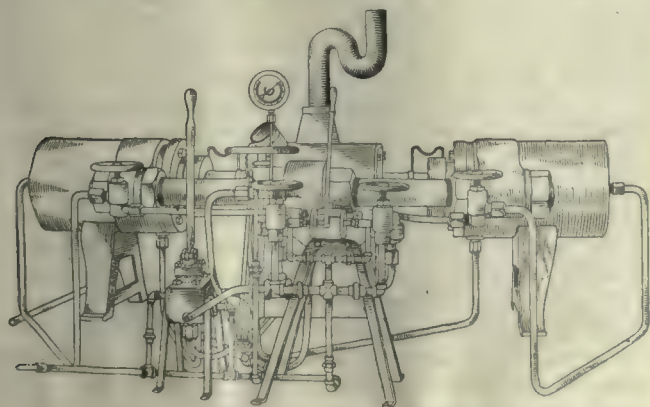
DRAWING OF TRAP-EXTRUDING MACHINE
